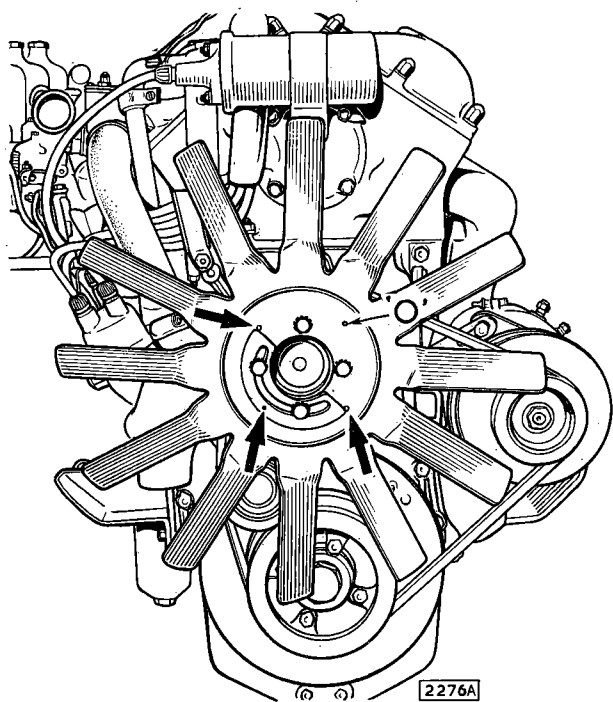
When refitting, the letter "O" stamped on the fan, distance piece and pulley should be in line. The arrows indicate the locating marks for the balance piece(s)
